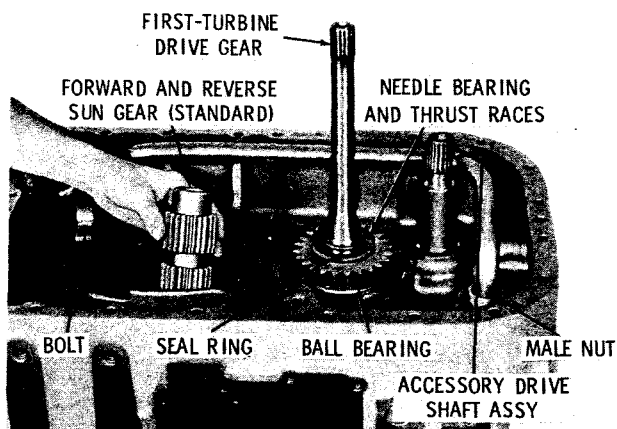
Removing standard speed, forward- and reverse-range sun gear
